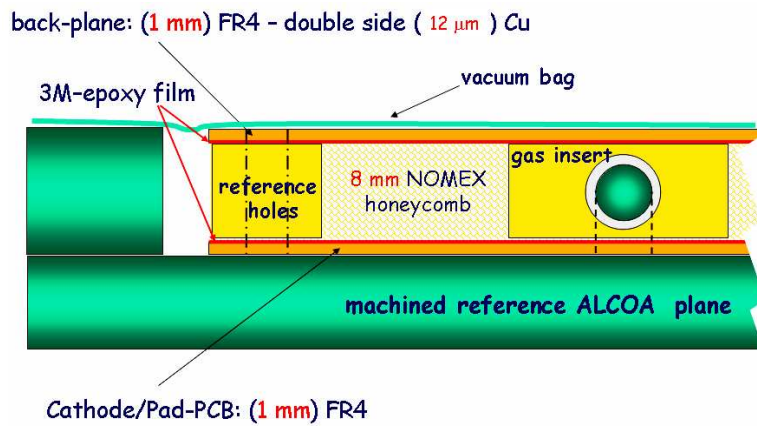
Sketch of the panel assembly in the vacuum bag.
